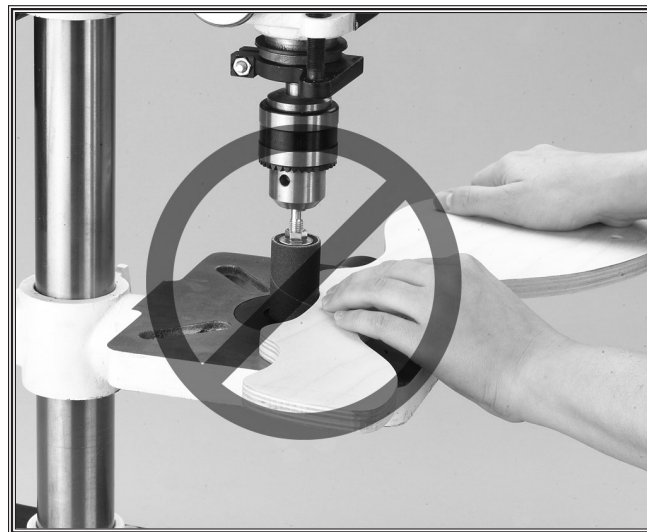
Keep fingers away from spinning drill bits, cutters, and sanding surfaces.
